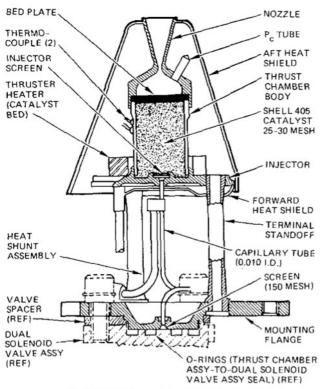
0.2-lbf Thruster Thrust Chamber Assembly [Rocket Research Corp.]
